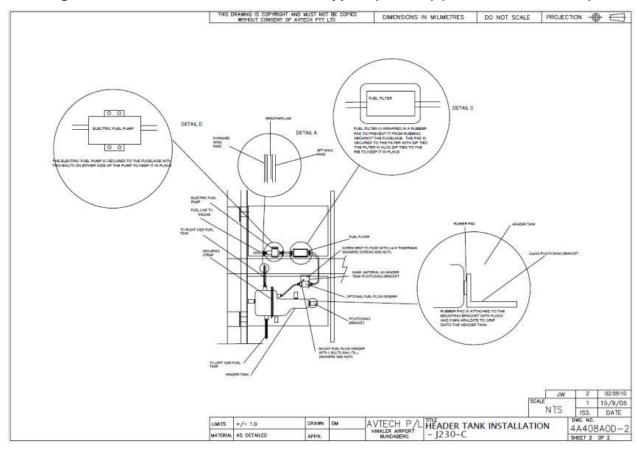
Header Tank Installation - Type 2 (Sheet 2) (all J-Series, n/a J120)
